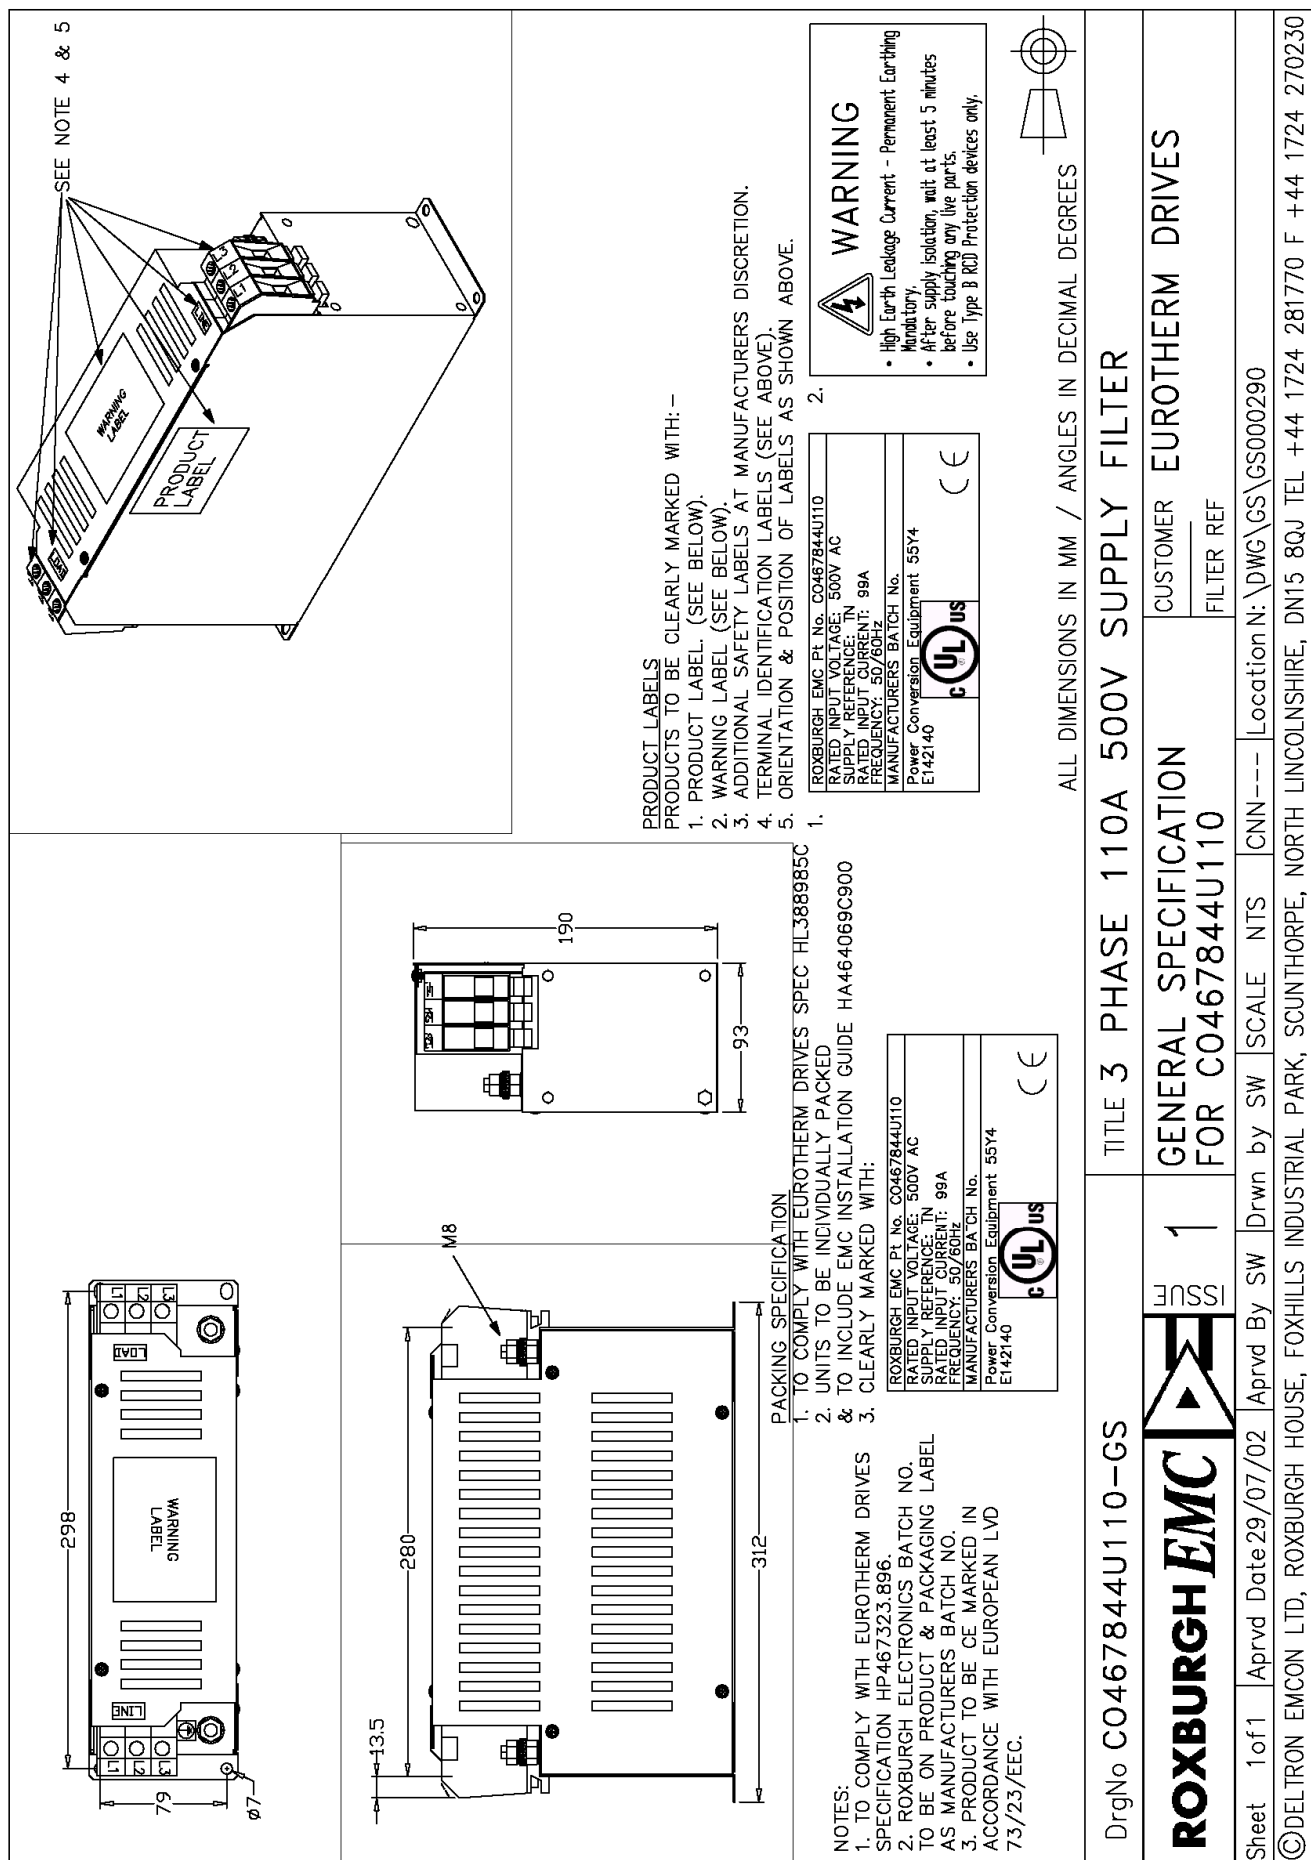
Filter Mounting Details, Part No. CO467844U110 for 590+ Frame 2 : 110 Amp
